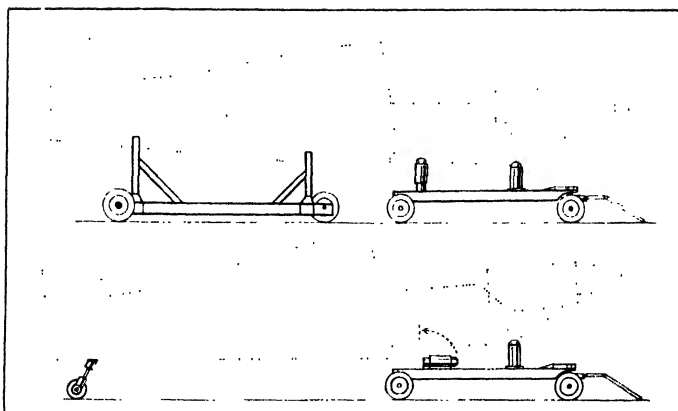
Diagram showing the method of removing a Stirling main plane from its assembly fixture.
